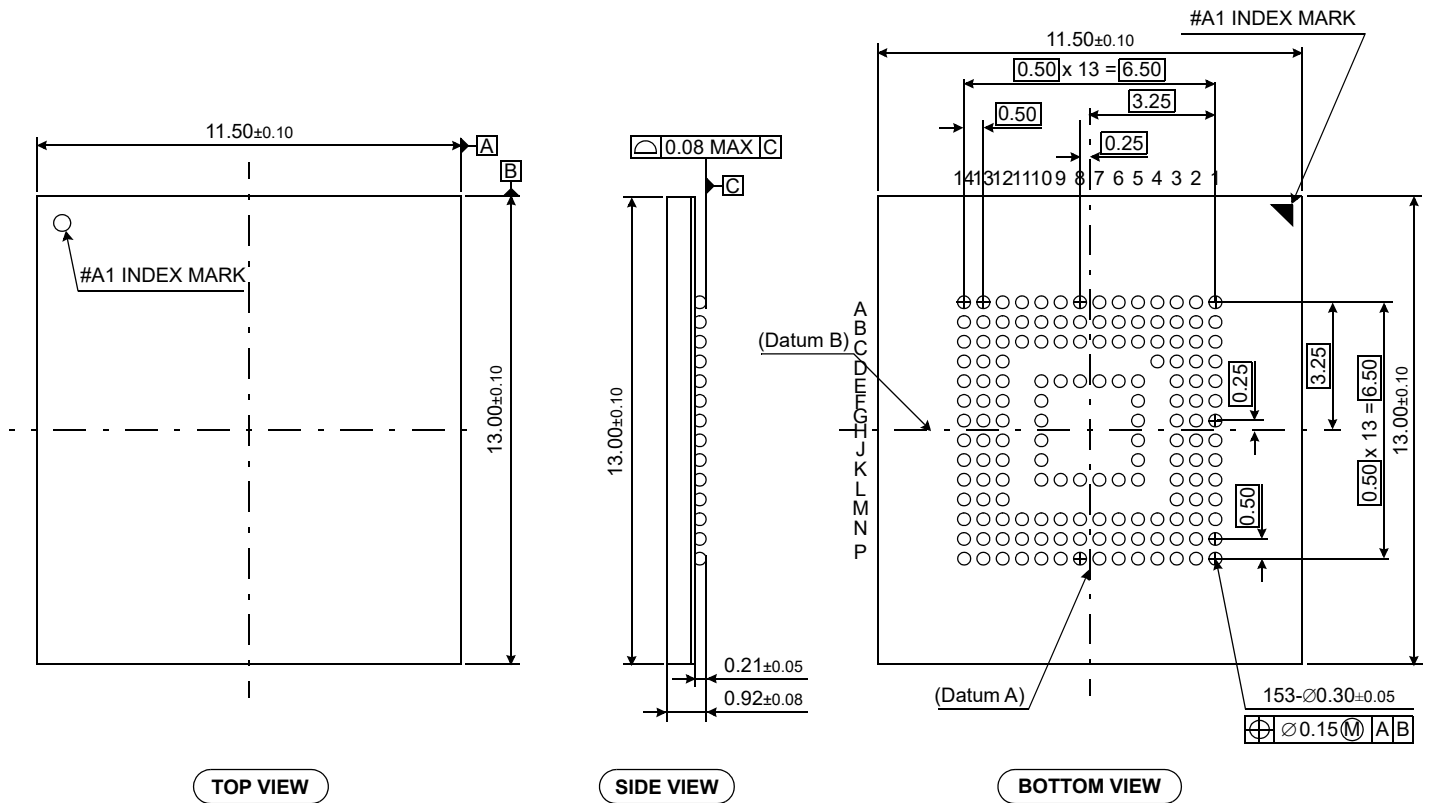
11.5mm x 13mm x 1.0mm Package Dimension
